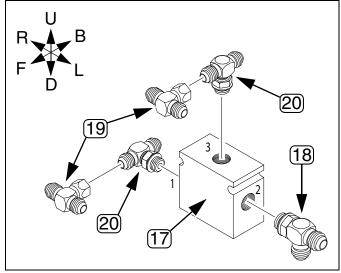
Assemble 2S DD1162+ Shuttle Valve
